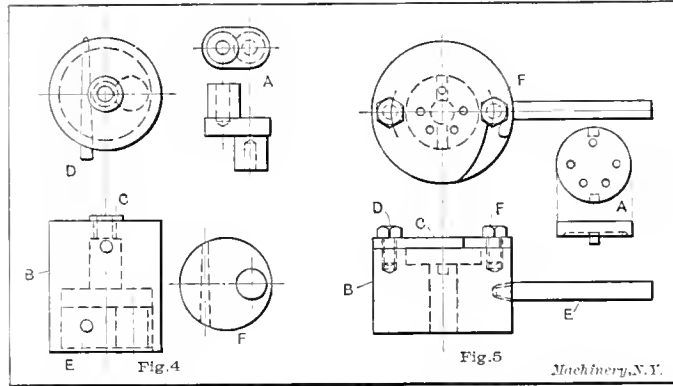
Ingenious Form of Jig for Drilling Crank A
